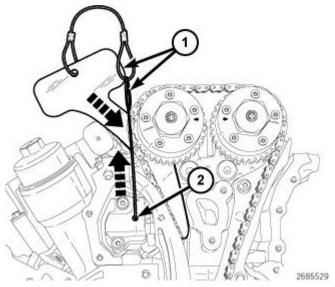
Pin, Rack & Timing Chain Holder Courtesy of CHRYSLER GROUP, LLC
